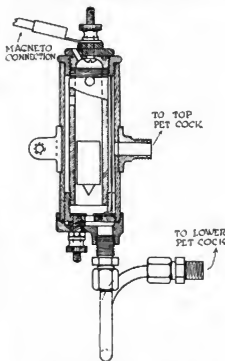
Duntley low-oil annunciator which cuts off ignition when the oil level is too low, thus preventing damage to the running parts
